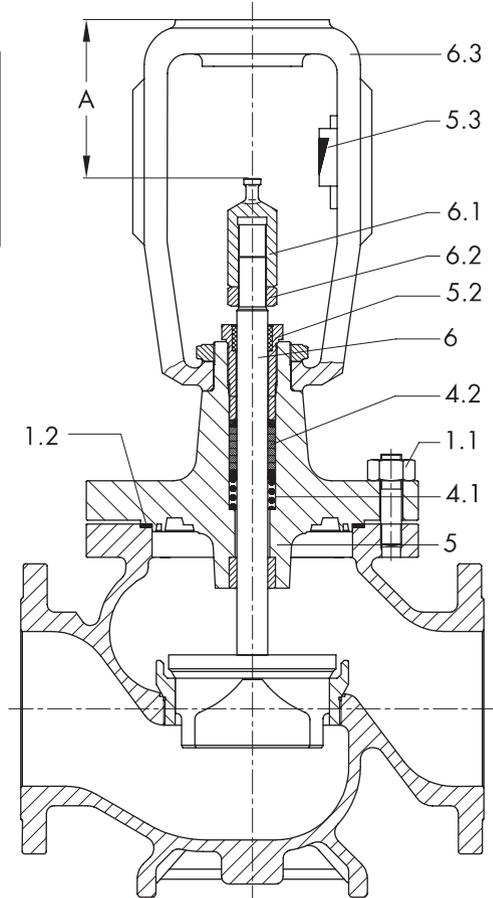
Sectional drawing of Type 3241 in nominal sizes DN 200 and 250
